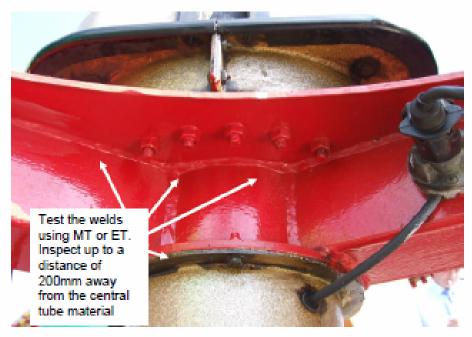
View of the welded fabrication attaching the three legs holding the seat assembles to the slew ring (later design).
